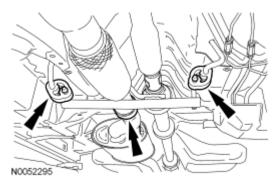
Locating Exhaust Flexible Pipe Clamp & Exhaust Hangers Courtesy of FORD MOTOR CO.
